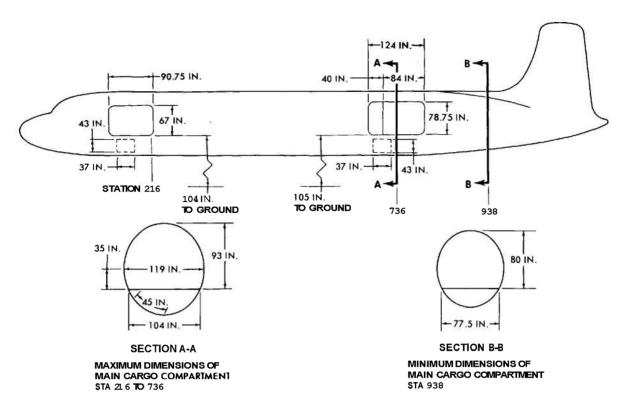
CARGO COMPARTMENT DIMENSIONS, C-118/DC-6B AIRCRAFT
